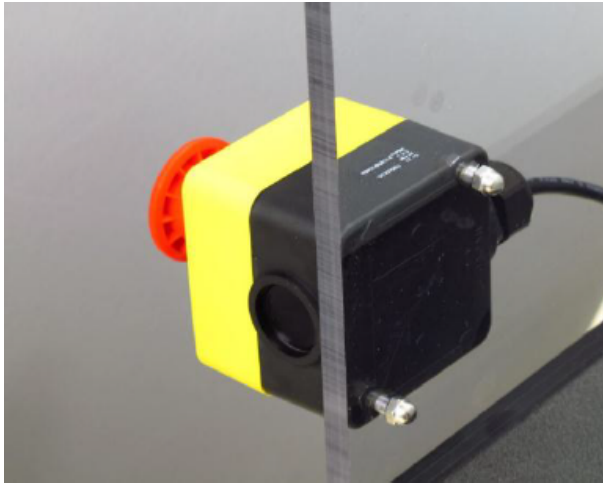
Rear View of E-Stop After Mounting (Shown mounted to safety barrier so that screw locations are more visible)
